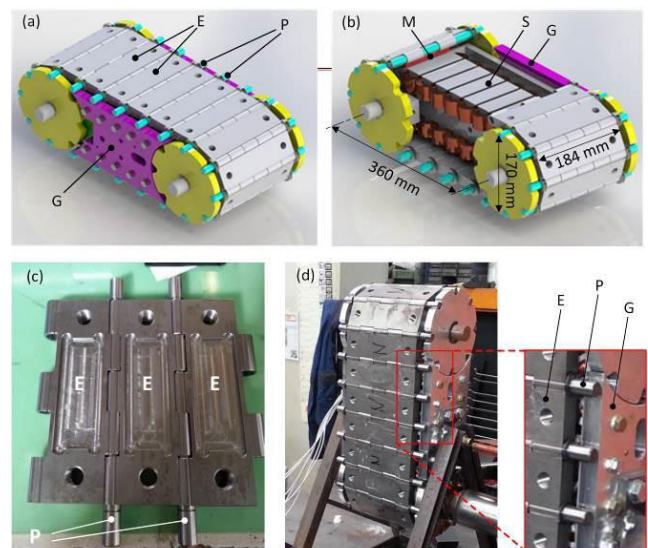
Mechanical design of the original prototype: (a)-(b) 3D renderings; (c) track elements and hinges before magnet assembly; (d) machine under testing.
